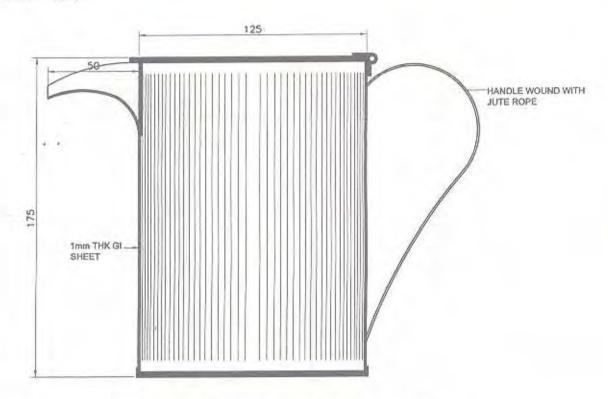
A Pouring Kettle for Hot-Poured Sealant
